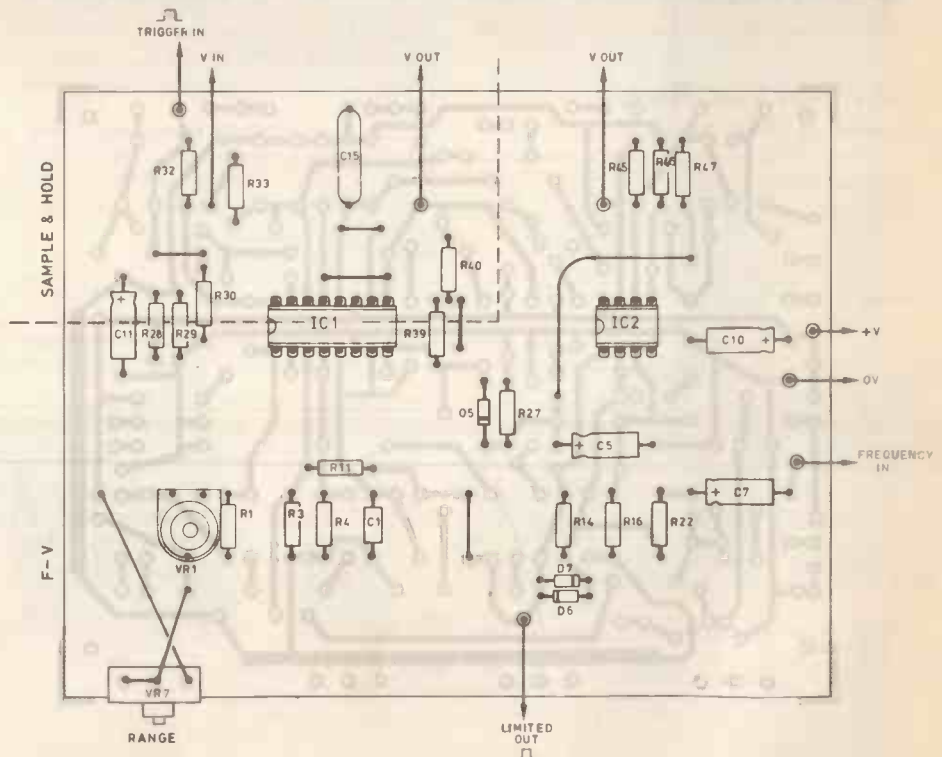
18. Printed circuit board component layout for the Sample and Hold and the Frequency to Voltage Converter. —Plan H.
